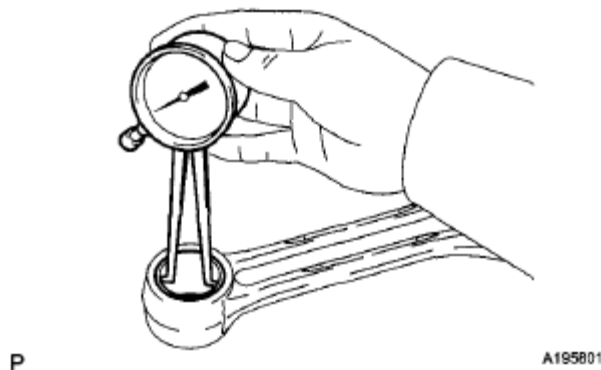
Measuring Connecting Rod Small End Bush Inside Diameter
